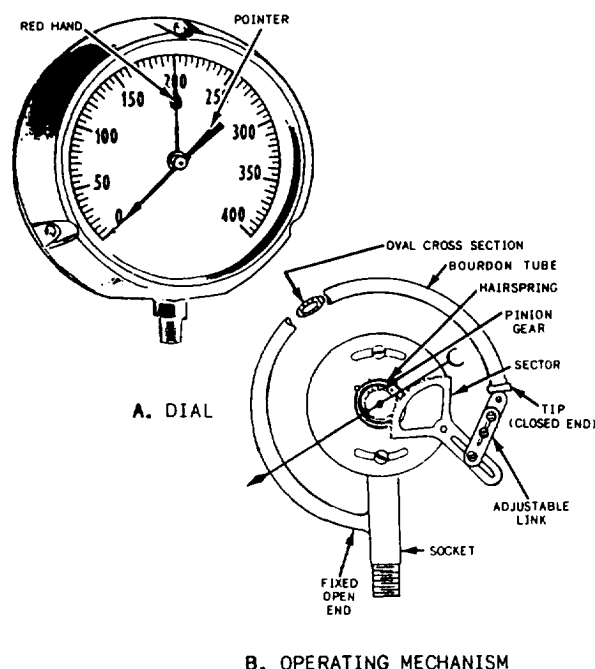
Simplex Bourdon-tube pressure gauge.
